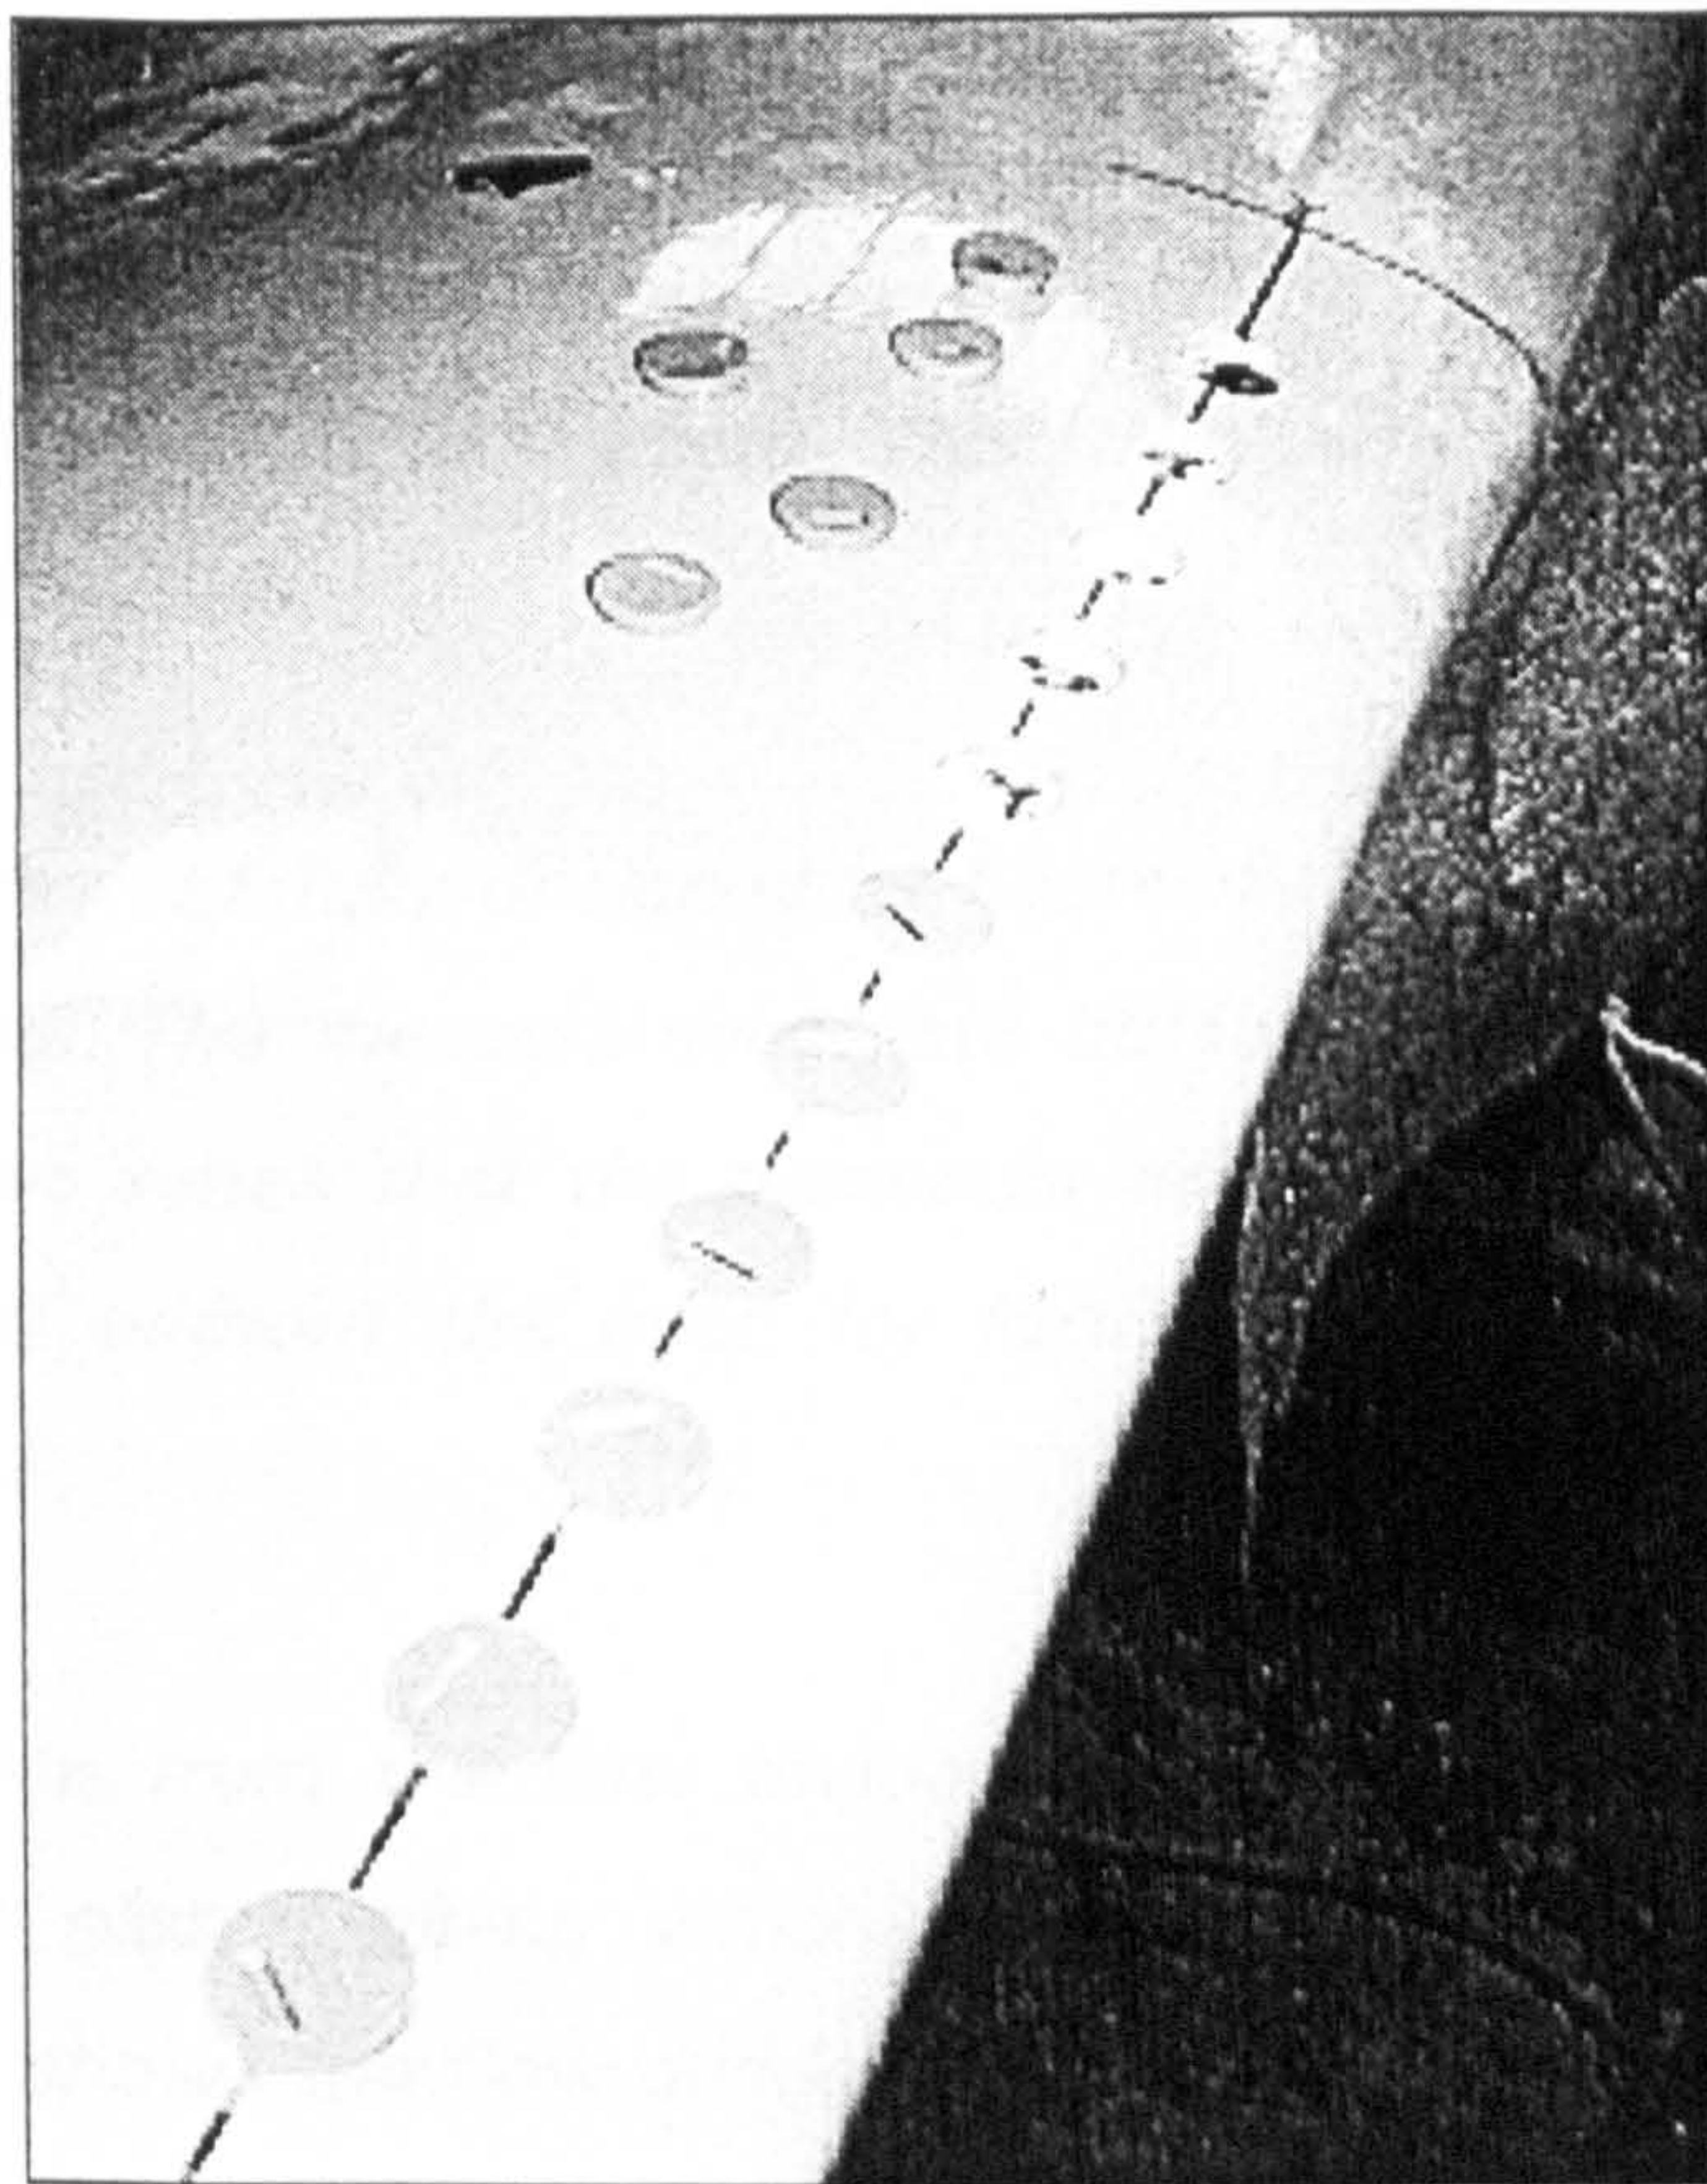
Air jet inserts dropped into the machined holes prior to alignment
